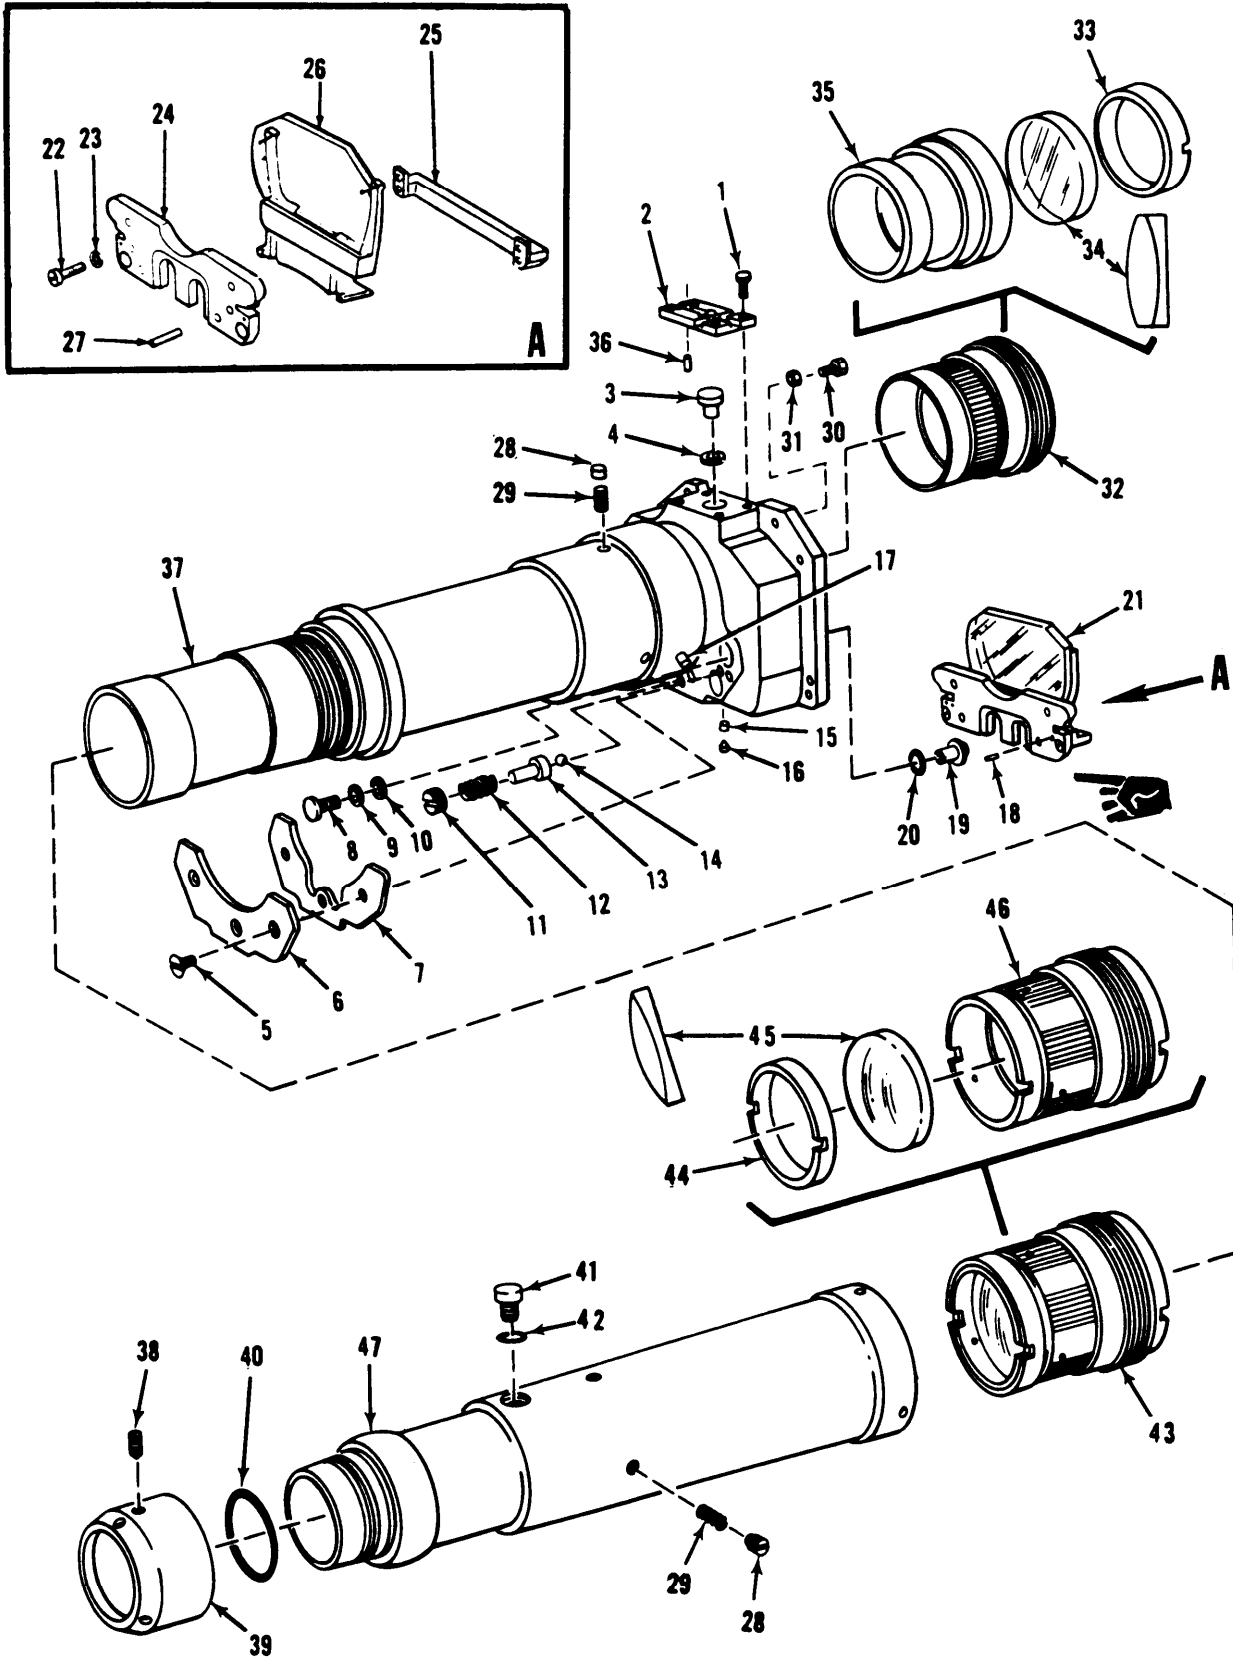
Articulated telescope, M105D 857400-1 and M105F 8574700-2 (partial view), Reticle assembly 8620422-3, Reticle assembly 8820422-5, cell assembly 8574772 and Cell assembly 8574773.
